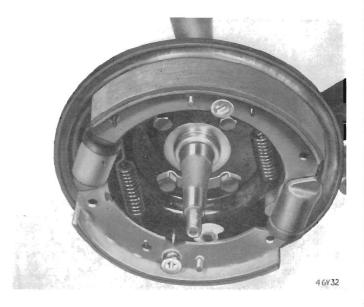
Securing the heads of steering attachment bolts with lock tabs
